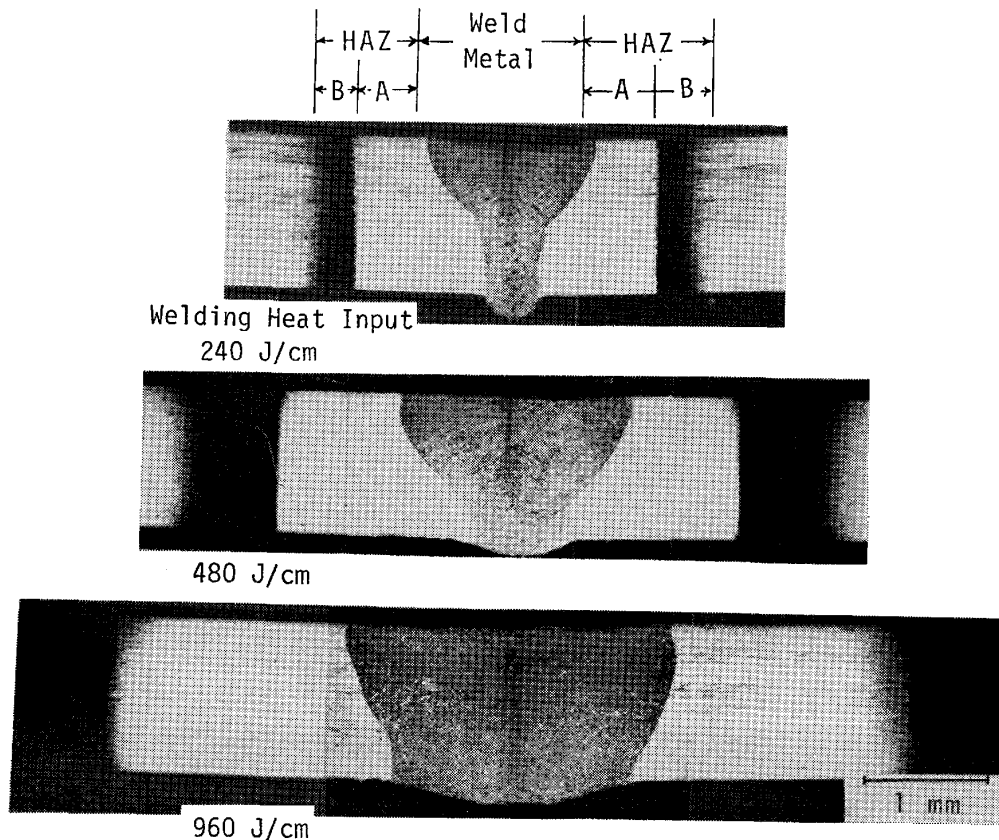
Transverse cross section macrostructures of weldment.
